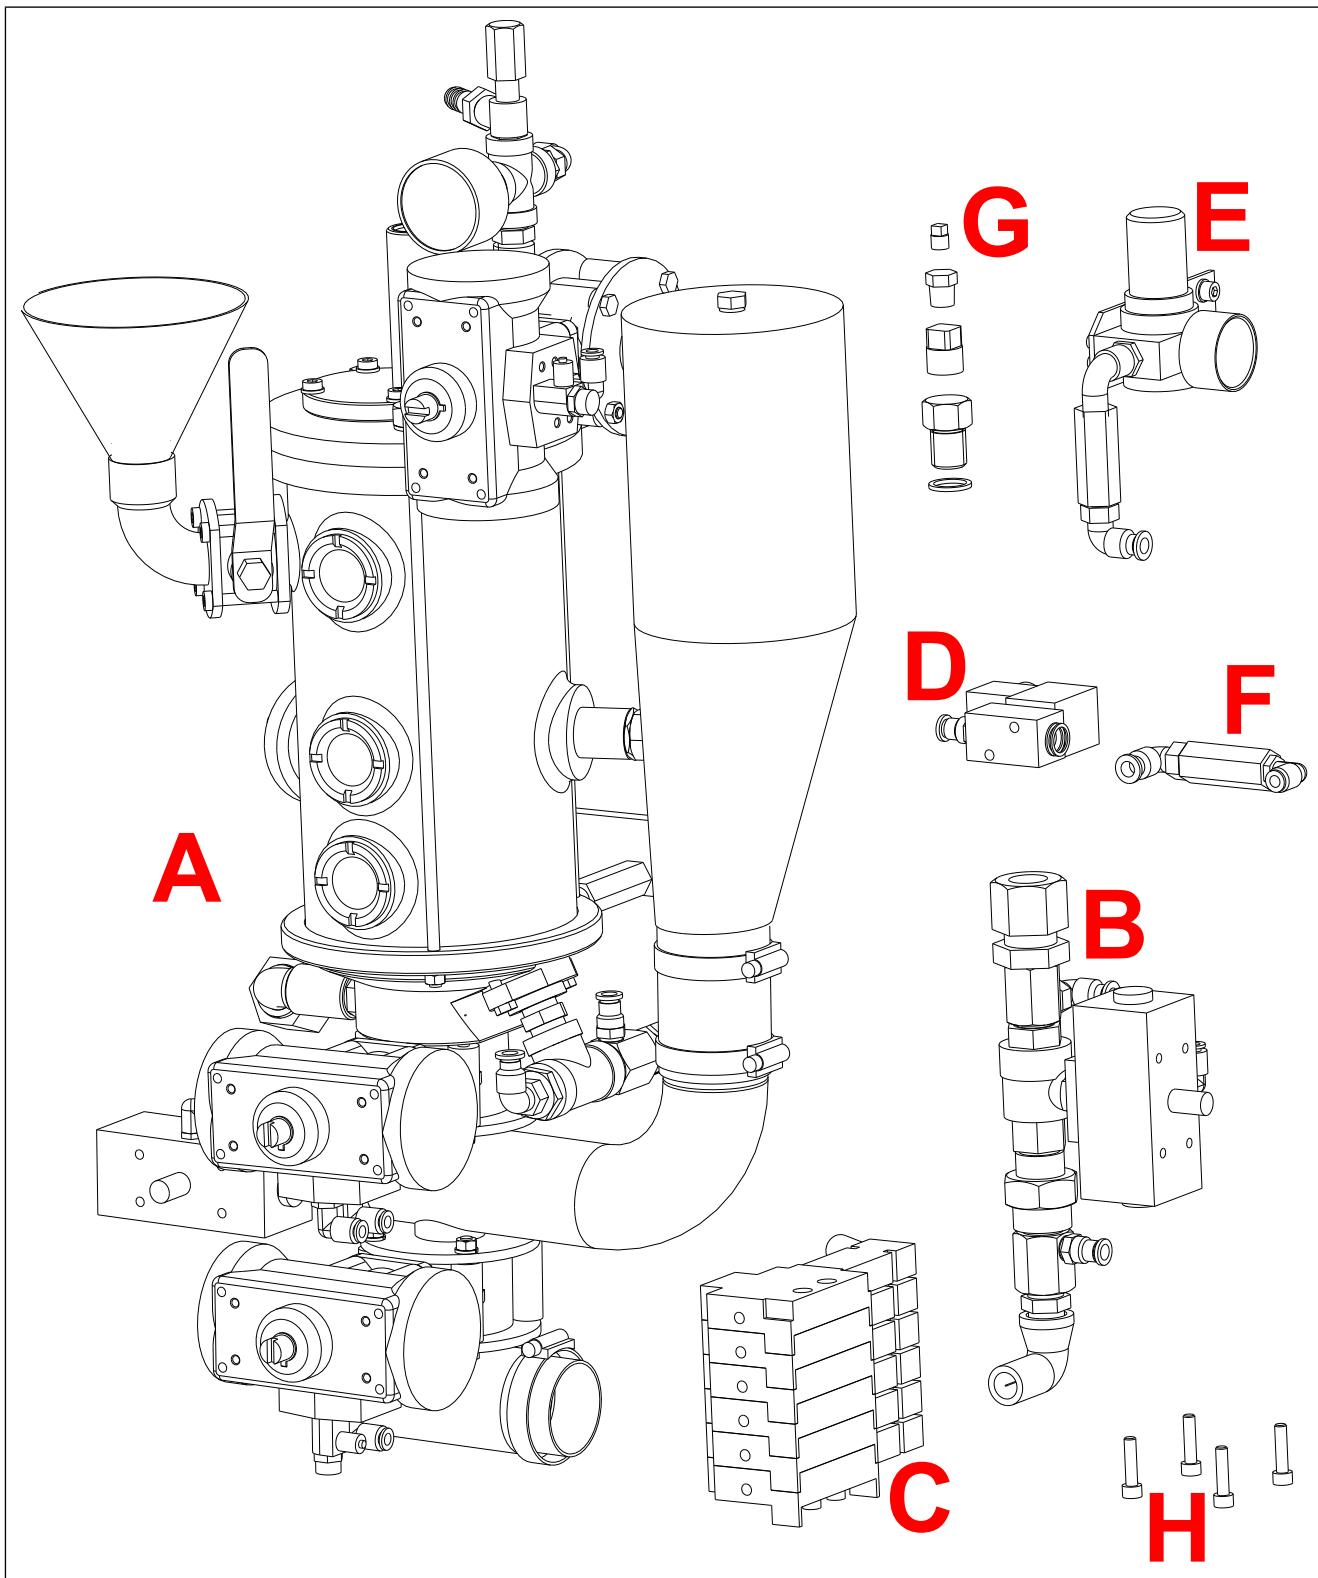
Parts required for Sweep module installation: A - Sweep module, B - 2-way valve assembly, C - solenoid valve block, D - water valve, E - pressure regulator, F - check valve, G - plugs for washing chamber connectors, H - mounting bolts.
